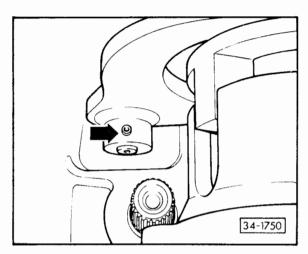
Drive out spring pin on selector fork and pull shift element completely out of the selector fork
